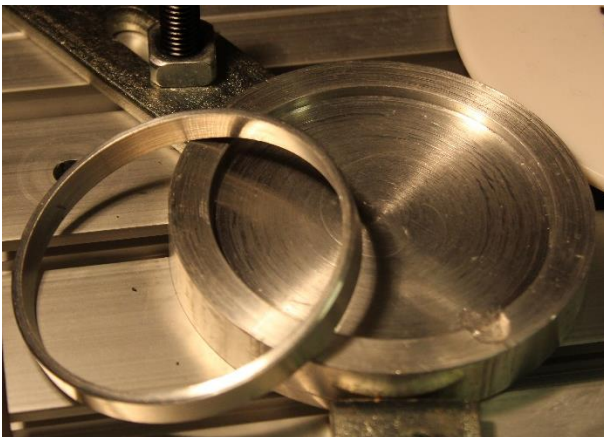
Aluminium holder and weight ring machined to locate the 47 mm diameter filters correctly for automated imaging and hold them flat.
